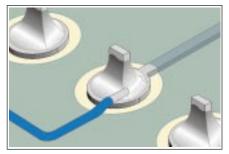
Acceptable* Wire wrapped around component lead on solder side.
